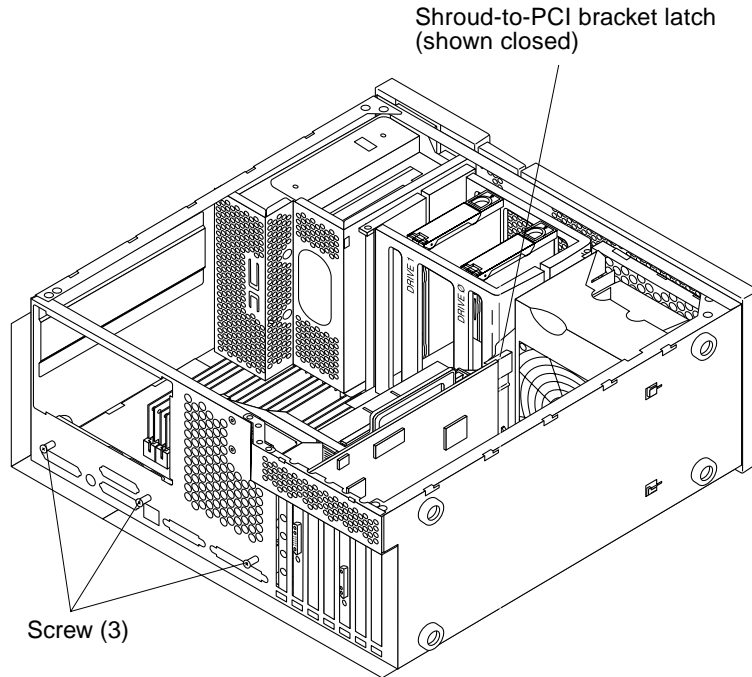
Removing and Replacing the Motherboard (Part 1 of 2)
